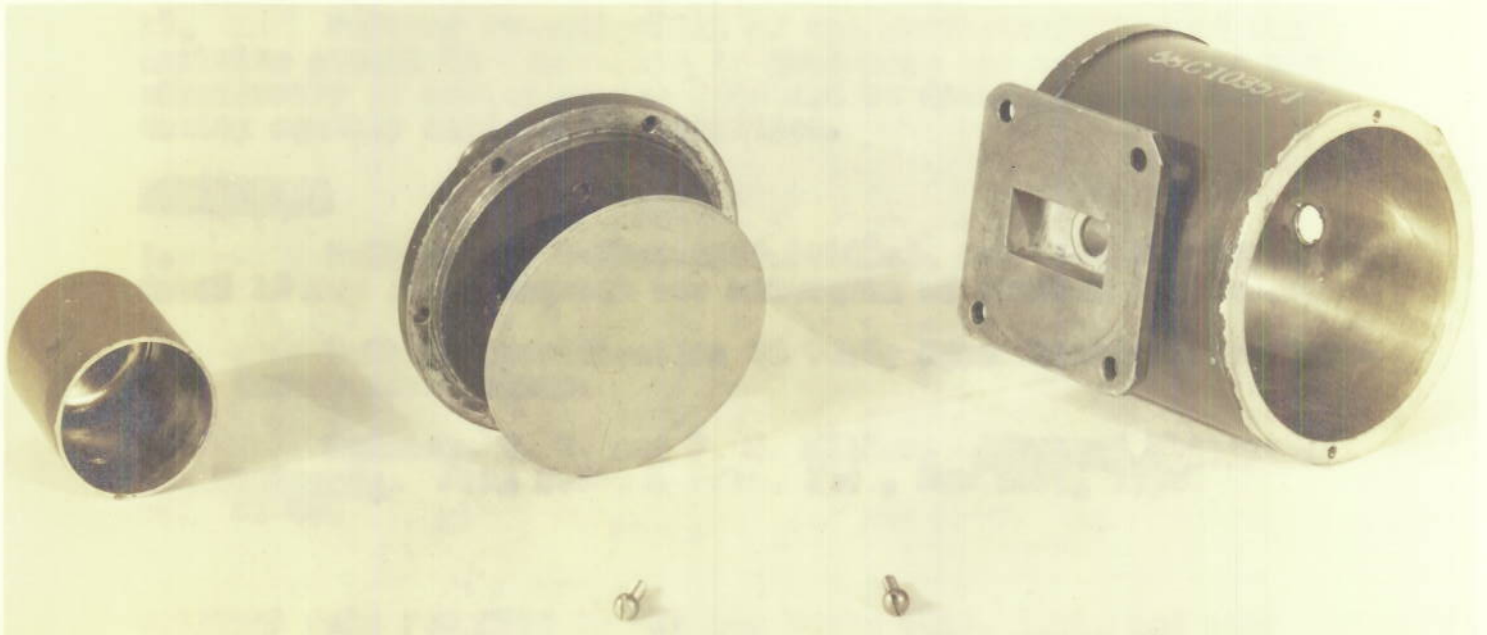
EXPLODED VIEW OF THE MODEL 1541(TFX-10GA) CAVITY
